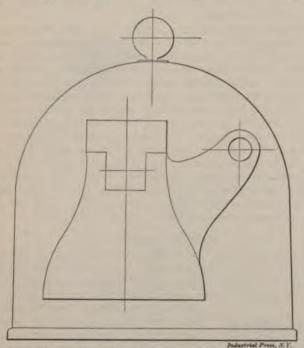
Outline of Variable Speed Motor and Lathe Headstock.
